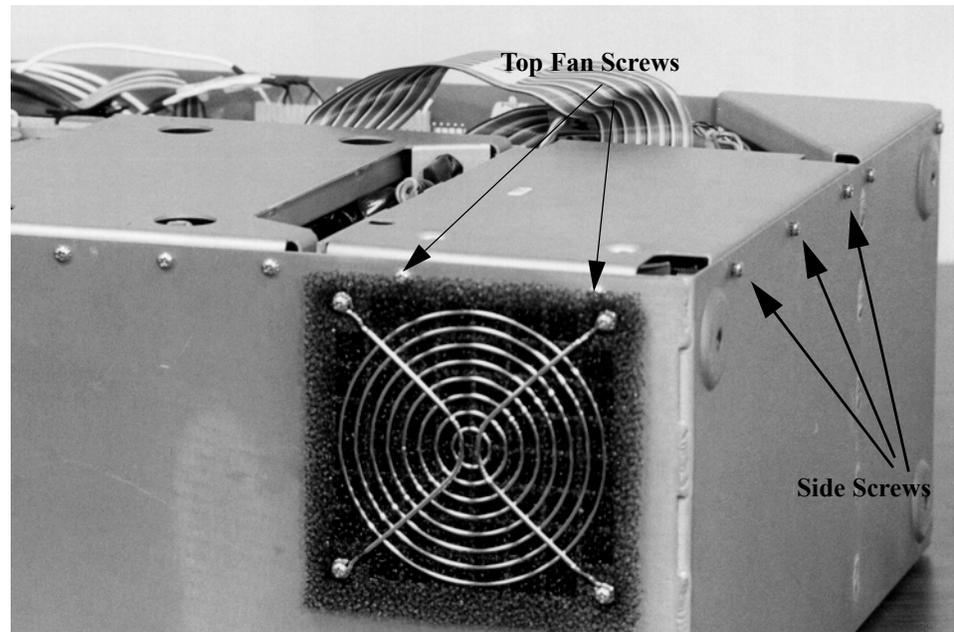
Amplifier Assembly, Captive Screw Locations
